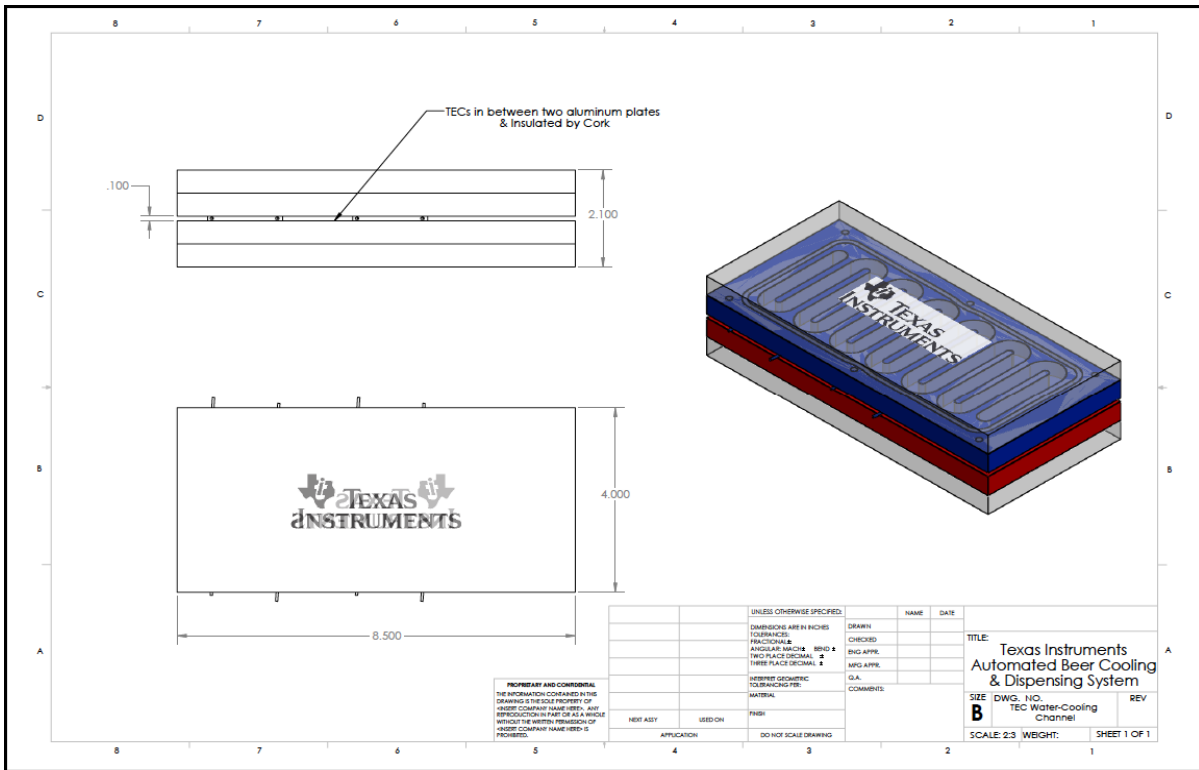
SolidWorks Drawing of the Machined Thermo-Electric Water-Cooling Channel
